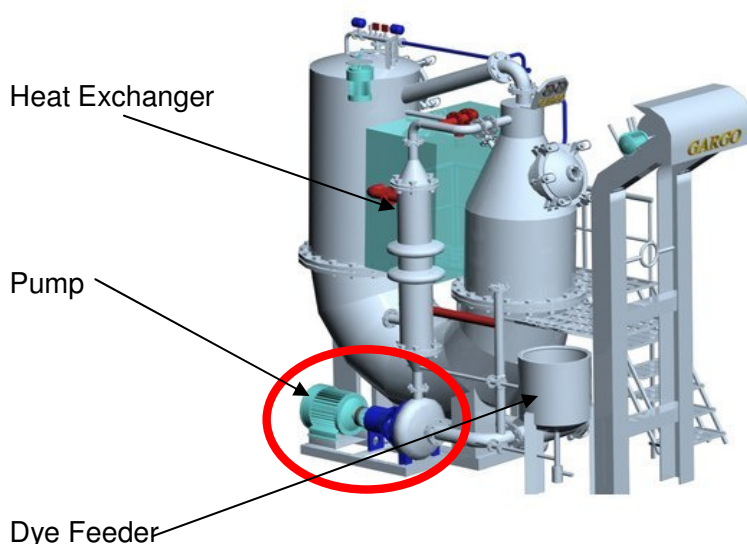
Sketch of Jet Dyeing Machine with location of pump
